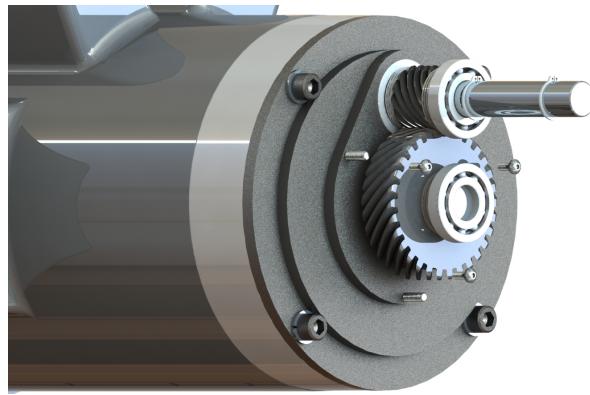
SolidWorks rendering of the Gearbox Internal Assembly
